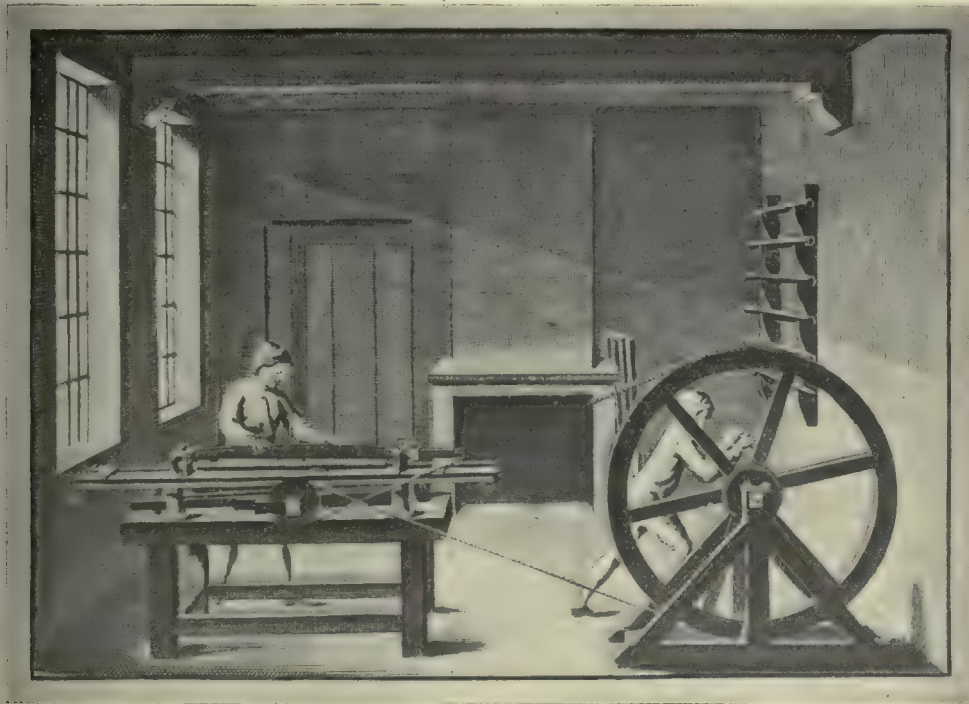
GUN-BARREL FINISHING MACHINE, 1763
